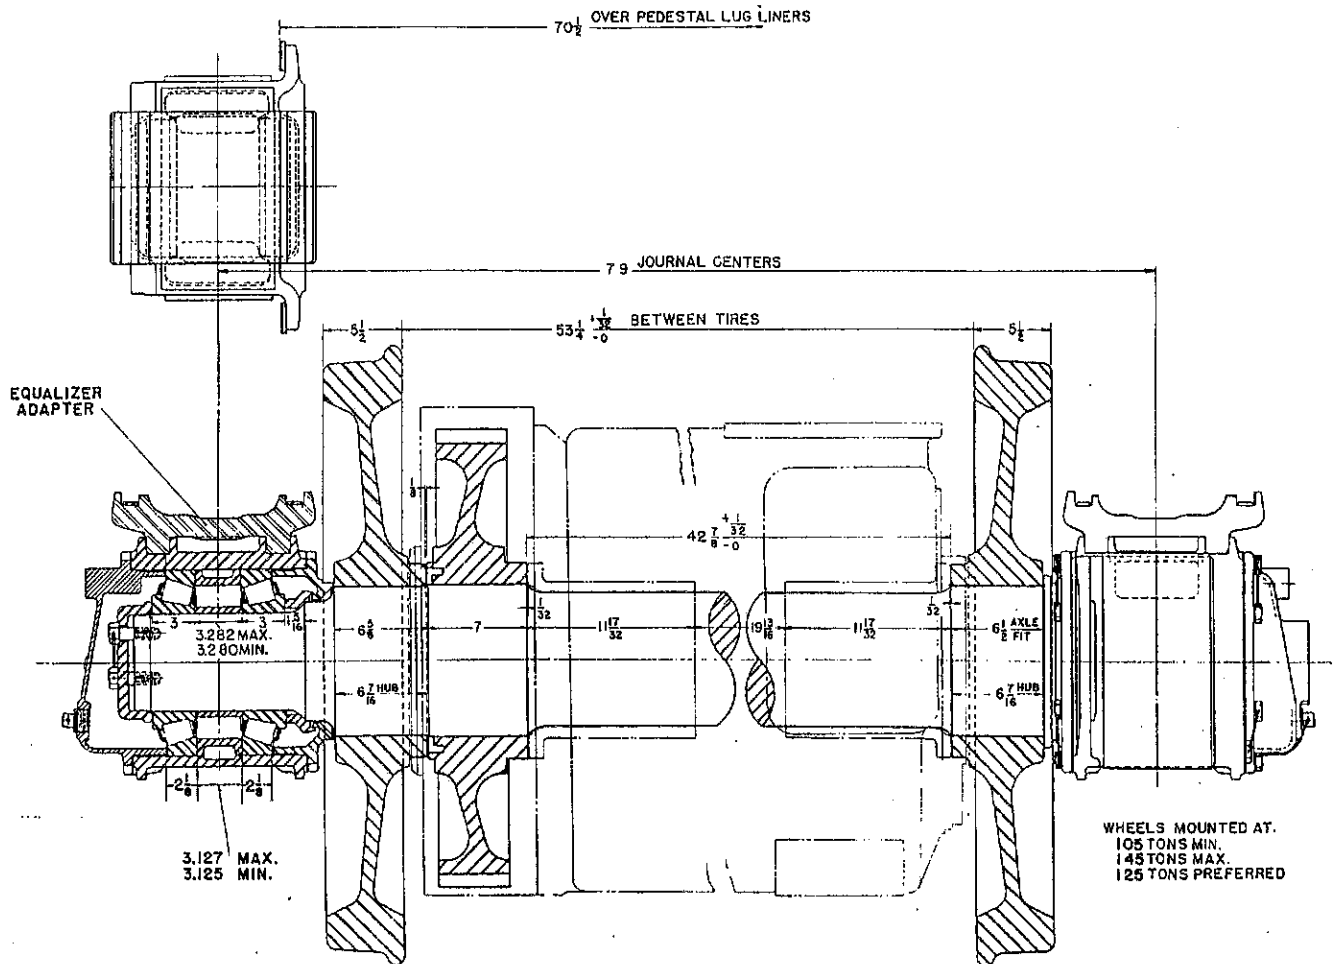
WHEEL, AXLE AND BOX ASSEMBLY WITH ROLLER BEARINGS
